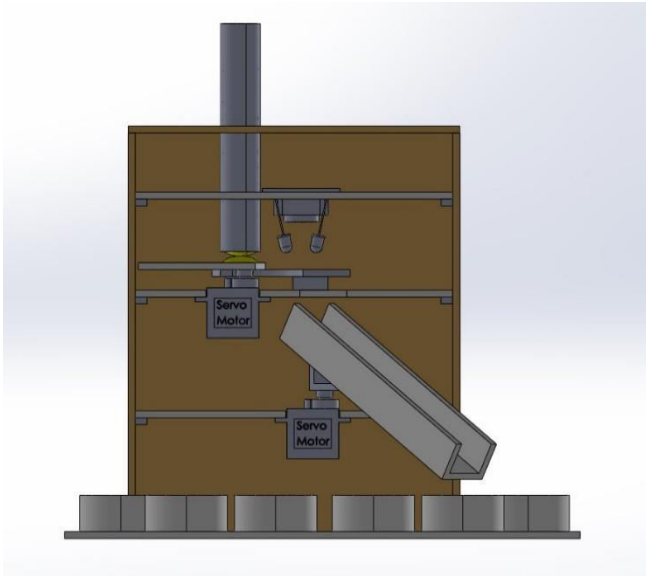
SIDE VIEW COLOUR SORTING MACHINE
